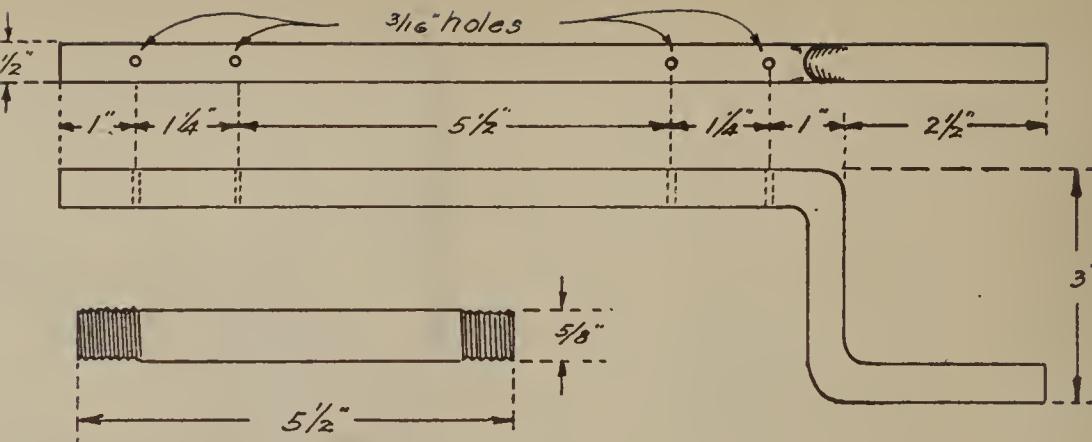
Take-up reel for small emergency wire. For take-up reel to hold spools of outpost wire, dimensions should be about doubled. Use $\frac{3}{8}$ -inch round iron and 18-gauge galvanized iron
